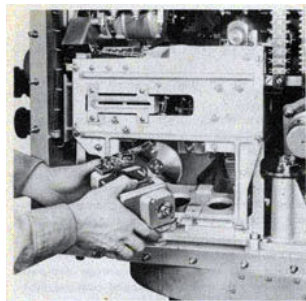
Withdrawing director sight angle motor from case in order to disconnect terminal wires.
